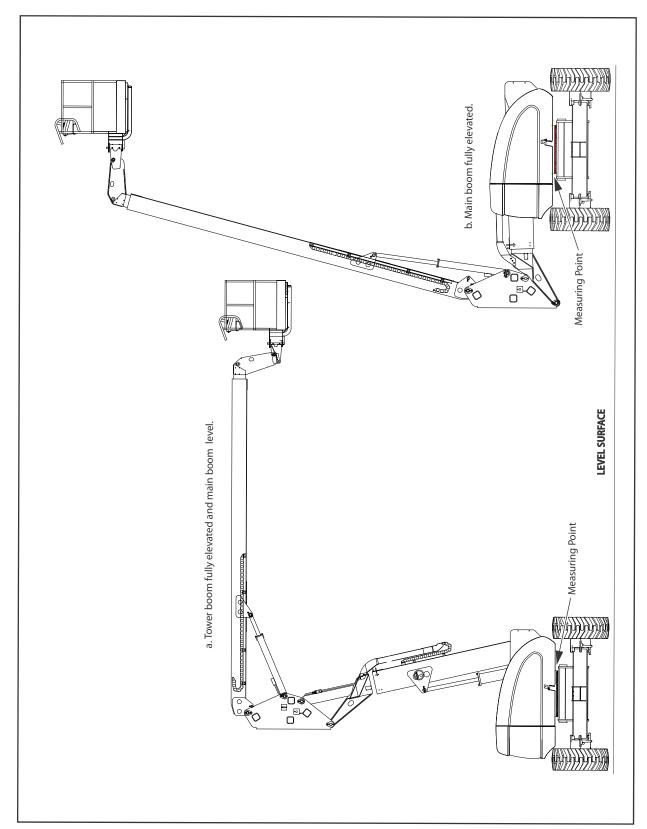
Swing Bearing Tolerance Measurement Location & Boom Placement
